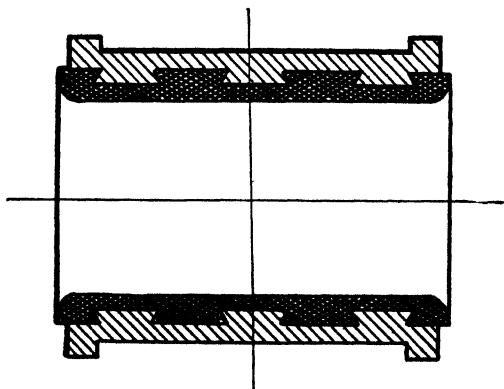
Method of Securing Babbitt Metal to Bearing Shells
